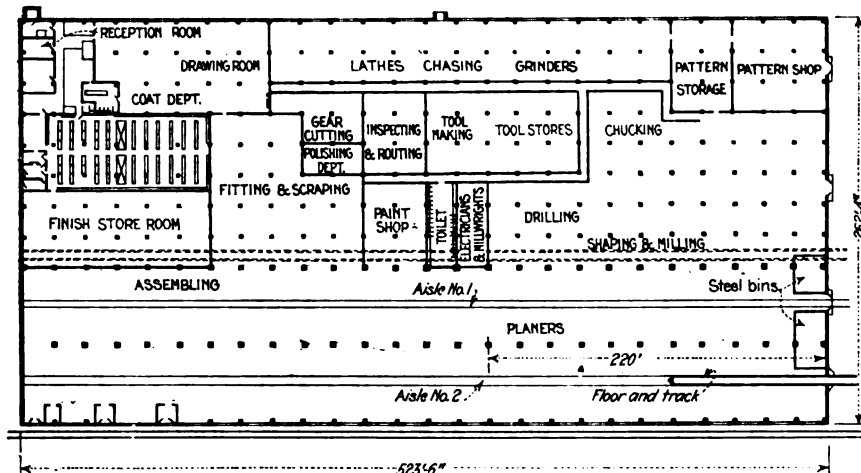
GENERAL LAYOUT OF PLANT, SHOWING BUILDINGS FOR SHIPPING
